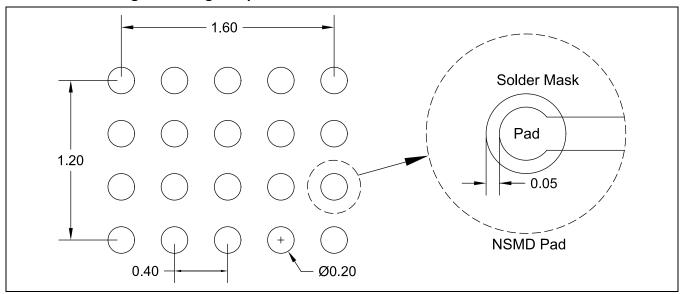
WLCSP 20B 2.1mm × 1.7mm soldering footprint (NOT TO SCALE)
